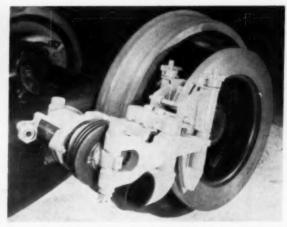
The "Pioneer III" is equipped with LWE brake equipment. Disk brakes of different design from that of the "CF" Budd are mounted on a tube welded to the truck side member and outboard of the wheels.
